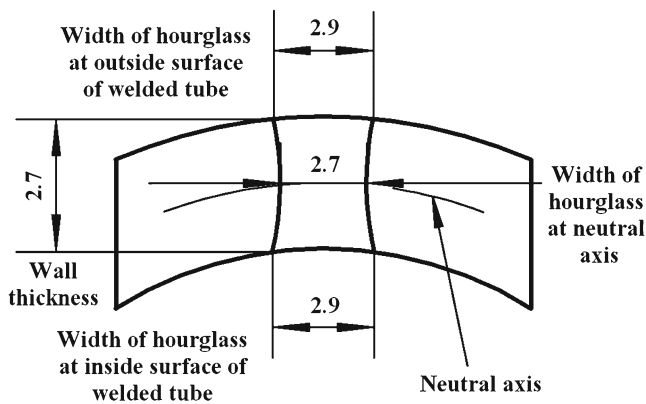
Schematic of the welded tube with an hourglass weld profile
